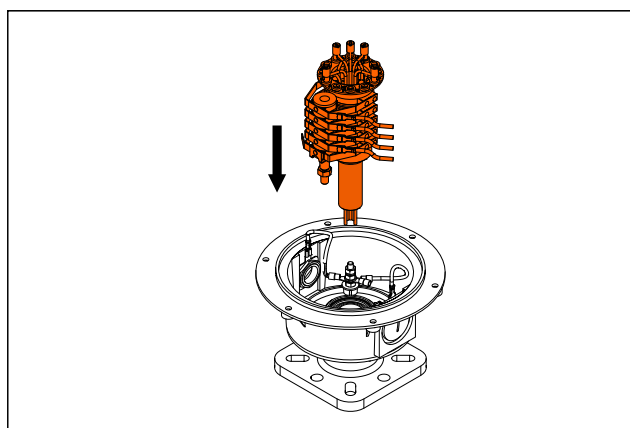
Place ring assembly with the current collector, insulator and brush bolt into the flange. Check current collector alignment with the slip rings.
